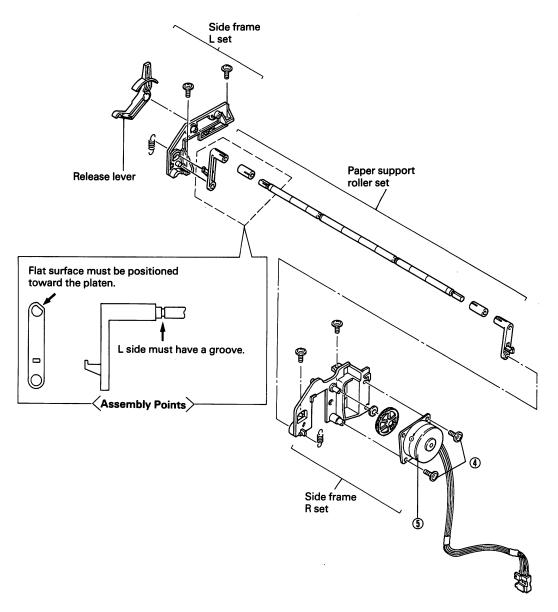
Side Frame and Paper Support Roller Disassembly
